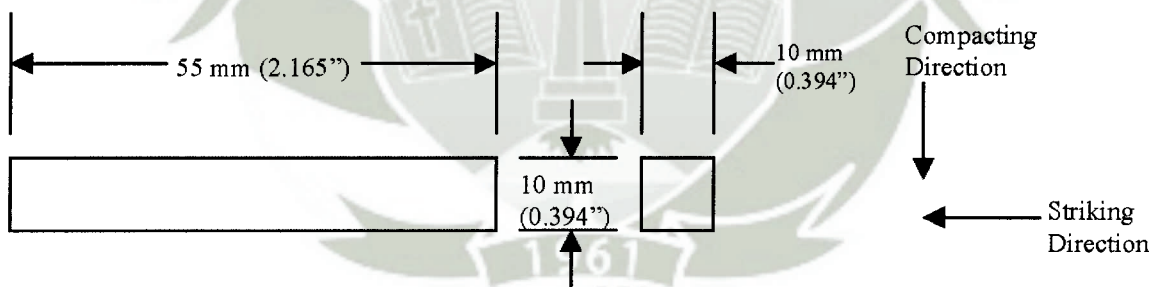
Izod (Cantilever-Beam) Impact Test Specimen, Type D
